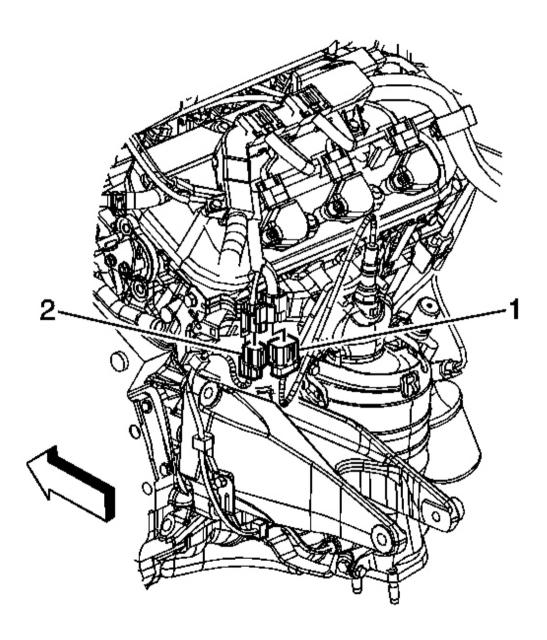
View of Heated Oxygen Sensor Wiring Harness Bracket & Bolt Courtesy of GENERAL MOTORS CORP.
